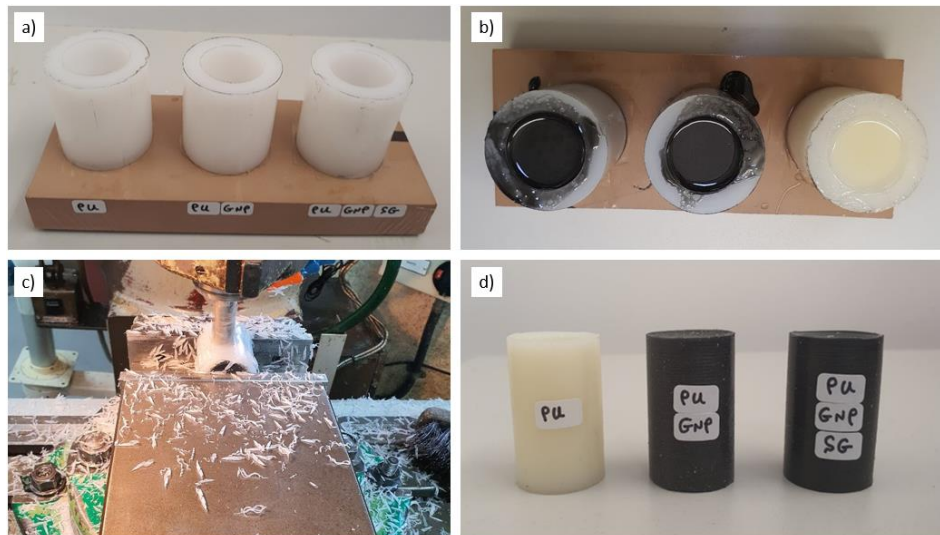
a) Manufactured mould for making specimens for drop ball test, b) pouring materials into the mould, c) using a milling machine for demoulding specimens, d) final specimens for testing.
